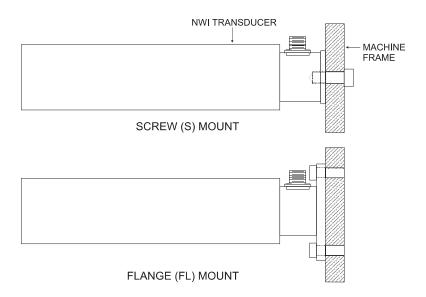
NARROW WEB TRANSDUCER MOUNTING STYLES
